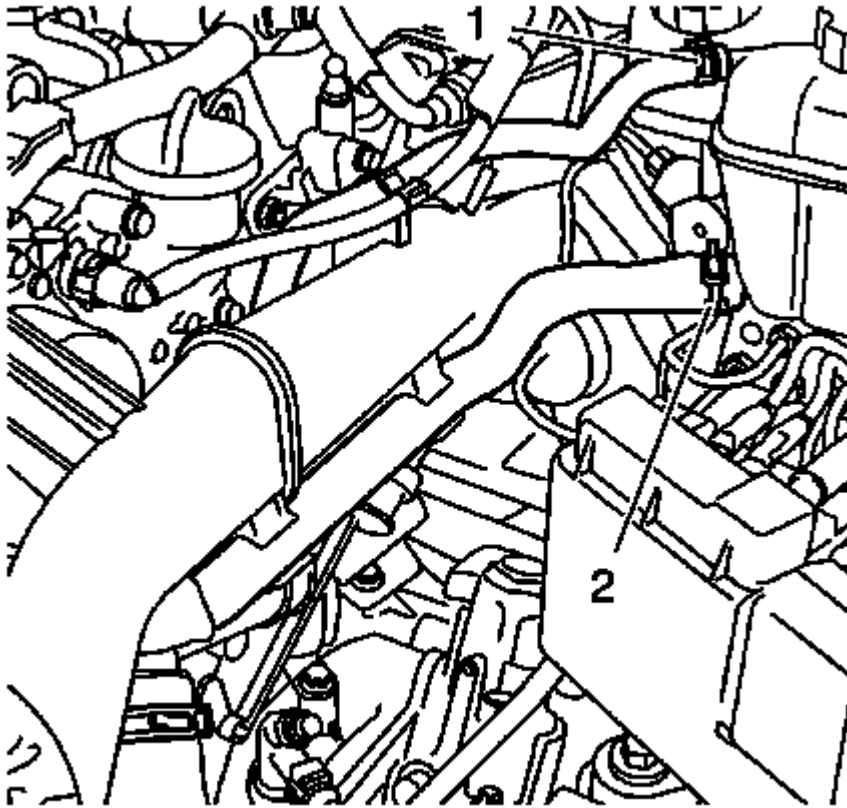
Fuel Return Pipe And Fuel Feed Pipe
